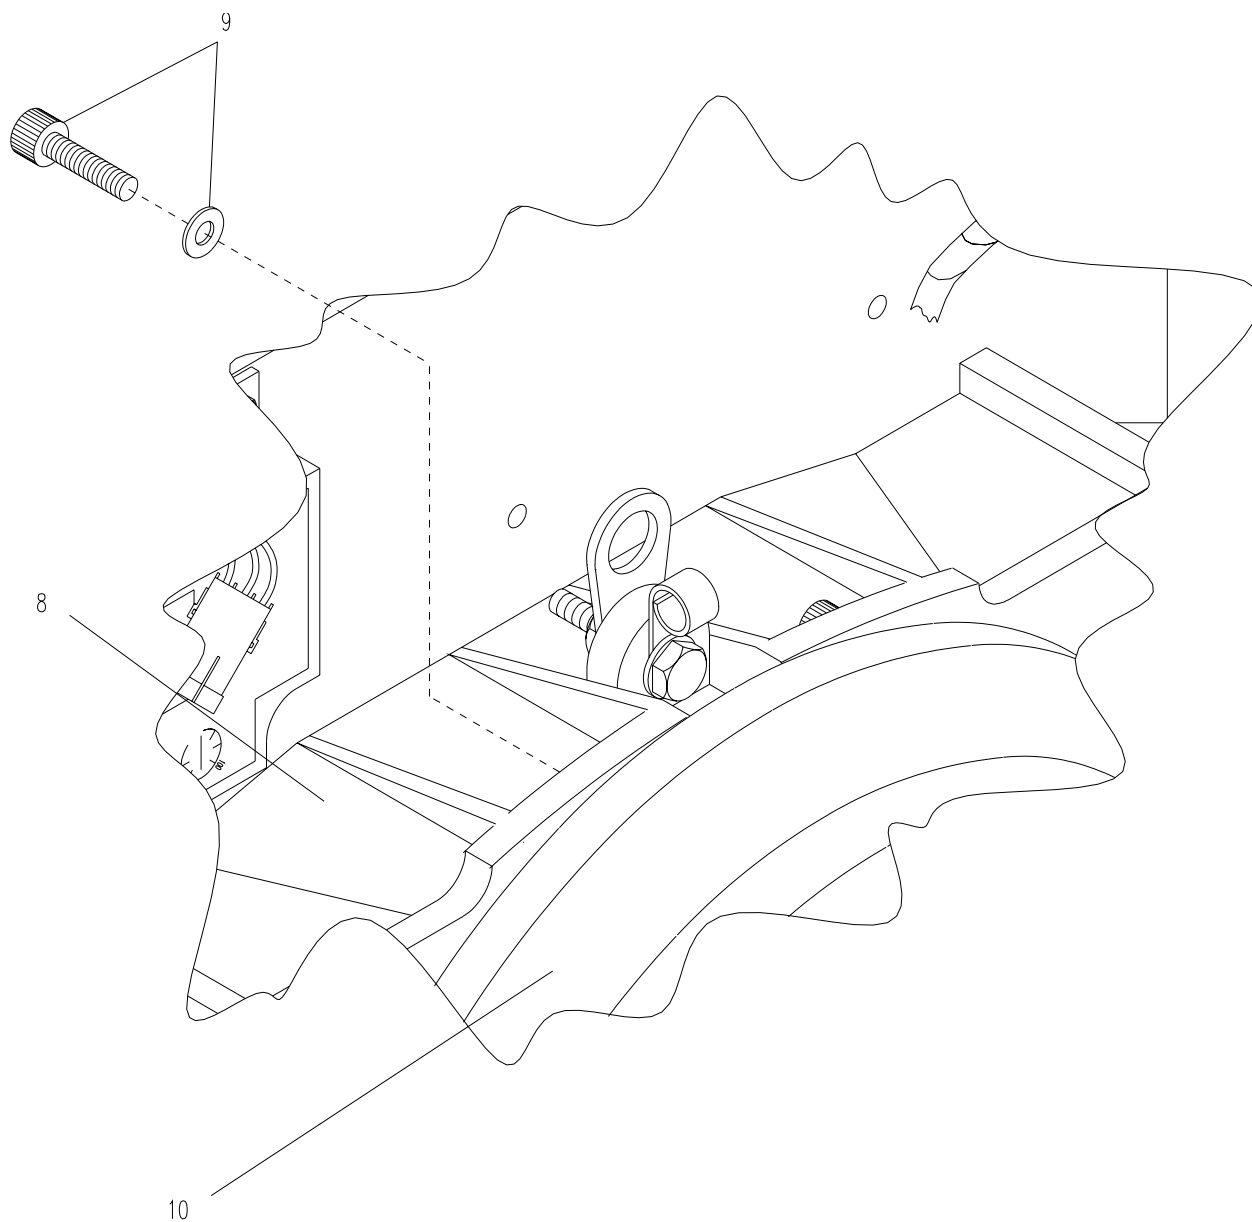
Diesel Engine (Sheet 3 of 11)
